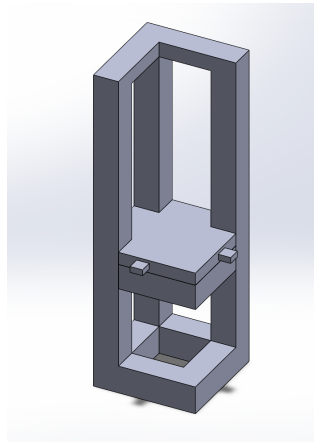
Isometric View of the Removable Stacking Plates Knee Crutch
